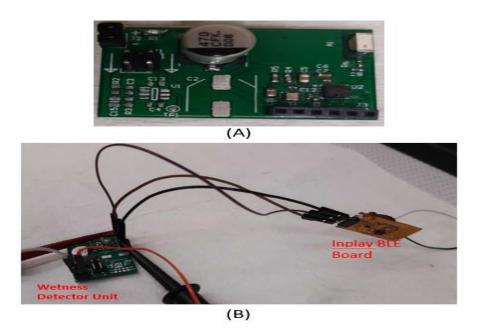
a) Complete soldered wetness detector PCB; b) Detector connected with external In-play BLE to Digital Multi-Meter Machine.
